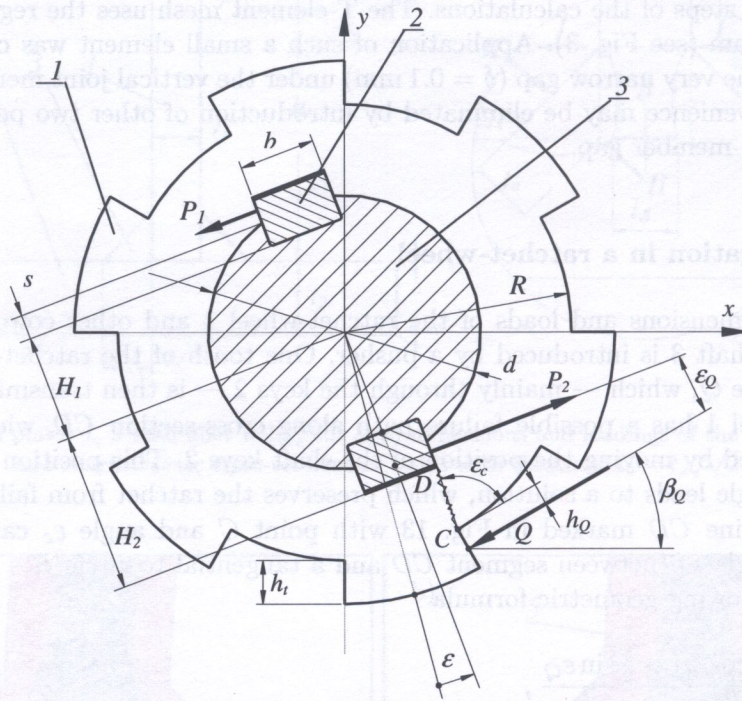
Geometry and loading of ratchet-wheel 1 and other elements: keys 2, shaft 3; CD – possible failure cross-section, ϵ – angle defining position of key
